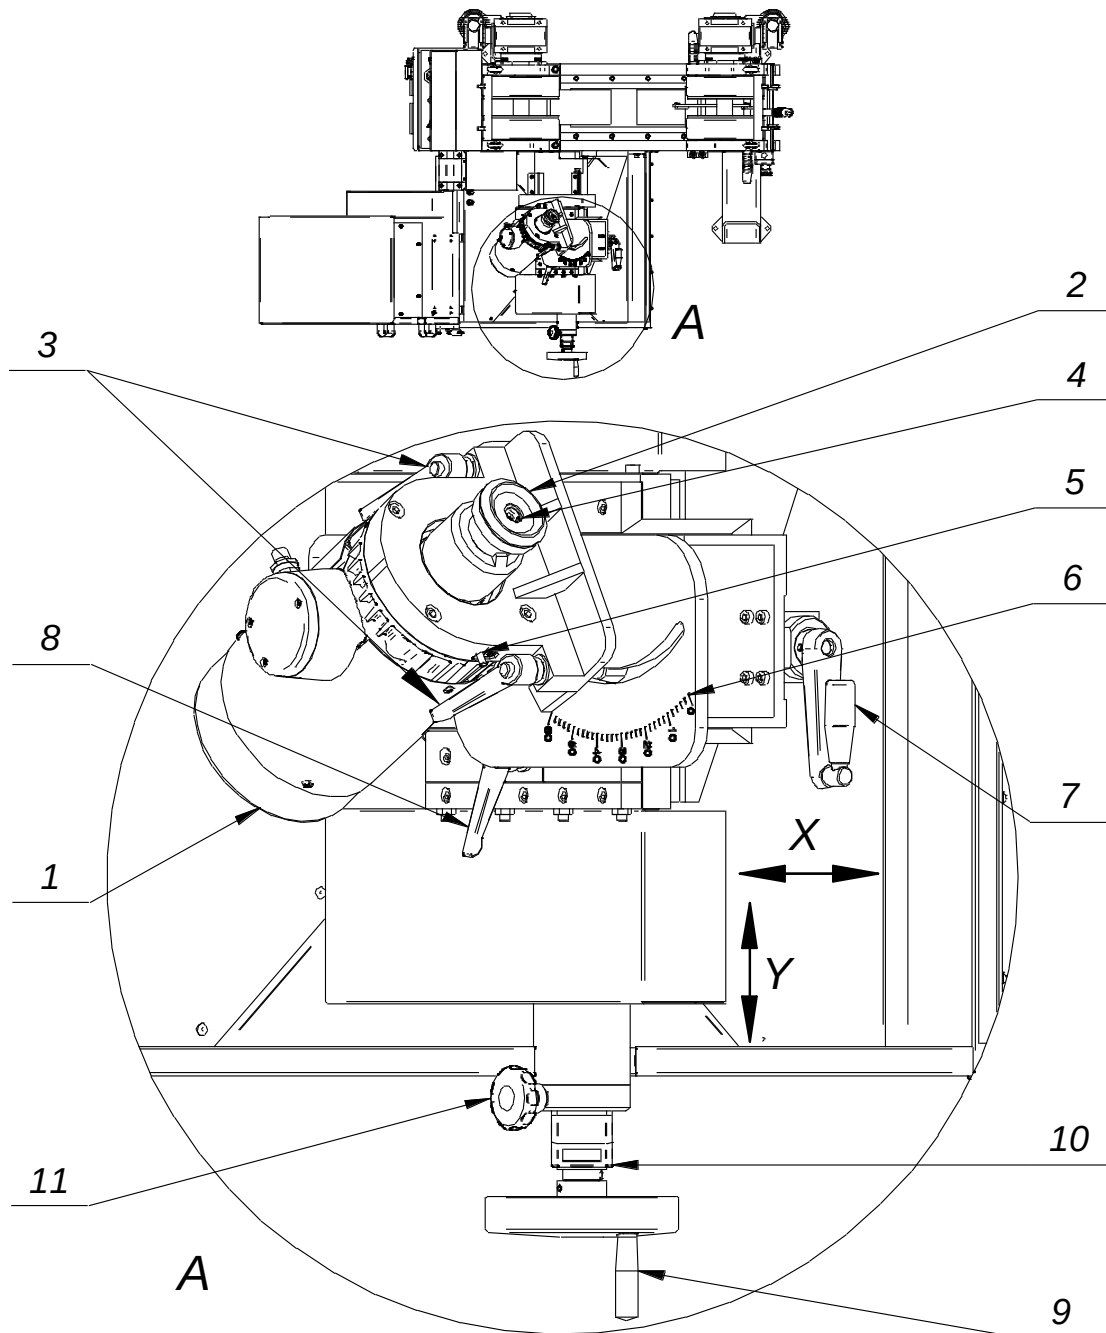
Milling unit design: 1 – motor, 2 – milling head, 3 – milling unit angle lock lever, 4 – bolt securing milling head, 5 – spindle rotation lock button, 6 – angular pitch, 7 – X-axis milling unit travel crank, 8 – X-axis milling unit travel lock lever, 9 – Y-axis milling unit travel crank, 10 – Y-axis travel meter, 11 – Y-axis milling unit travel lock knob
